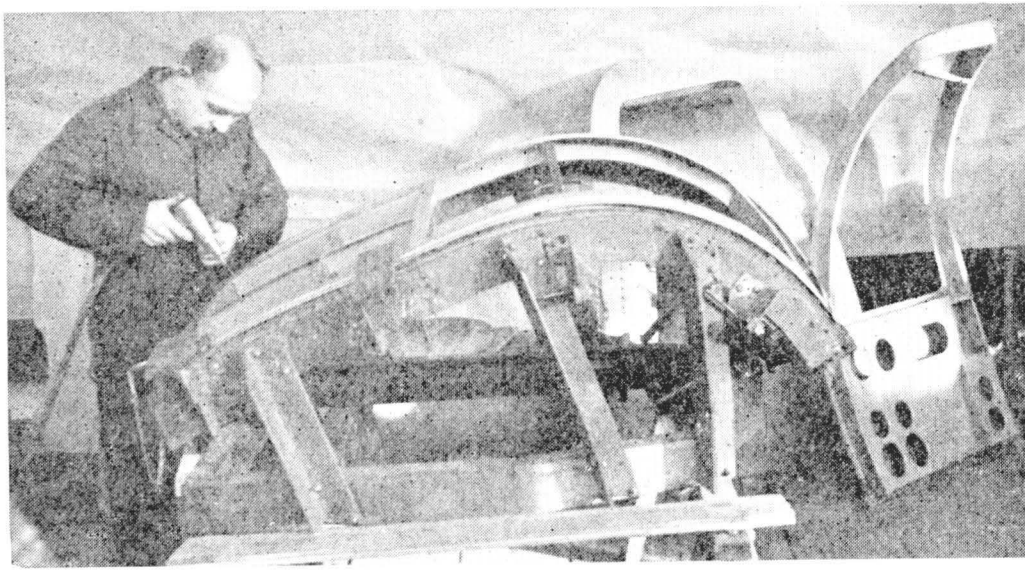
The door is large and of a rather complex shape, so that careful jiggling is necessary
